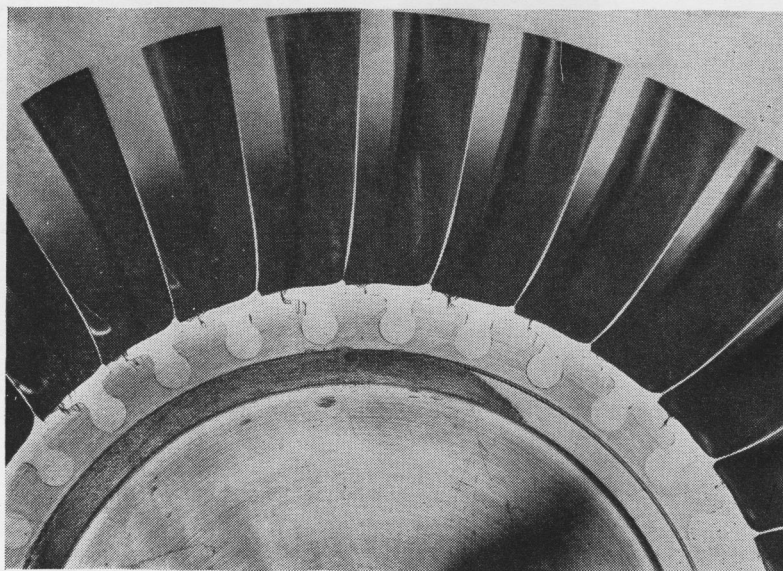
The turbine blades have bulb roots fitting into milled slots and are secured by peening the shanks of the roots into chamfers at each end of the slot. The blades are machined and hand-finished.
